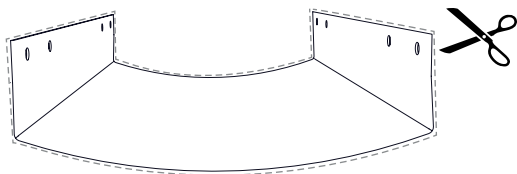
Trim top and bottom of grille cloth, open screw holes, and secure folded sides with glue
